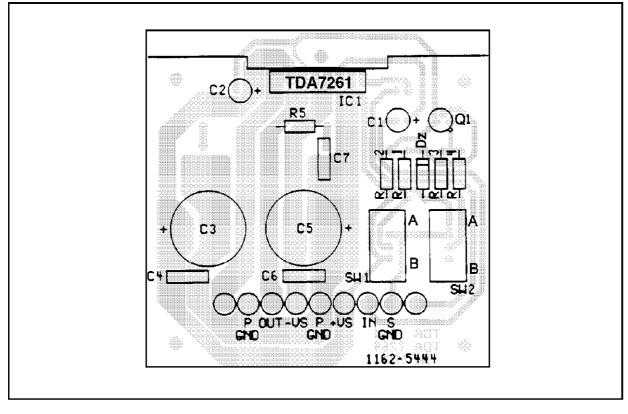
P.C. Board And Component Layout of the Demo Board Schematic (1:1 Scale)
